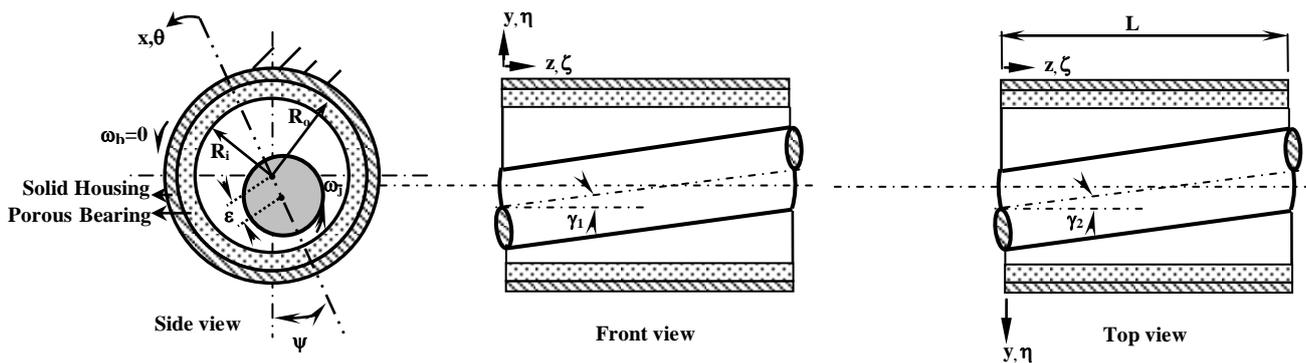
Geometrical Configuration of the Misaligned Porous Journal Bearing.
